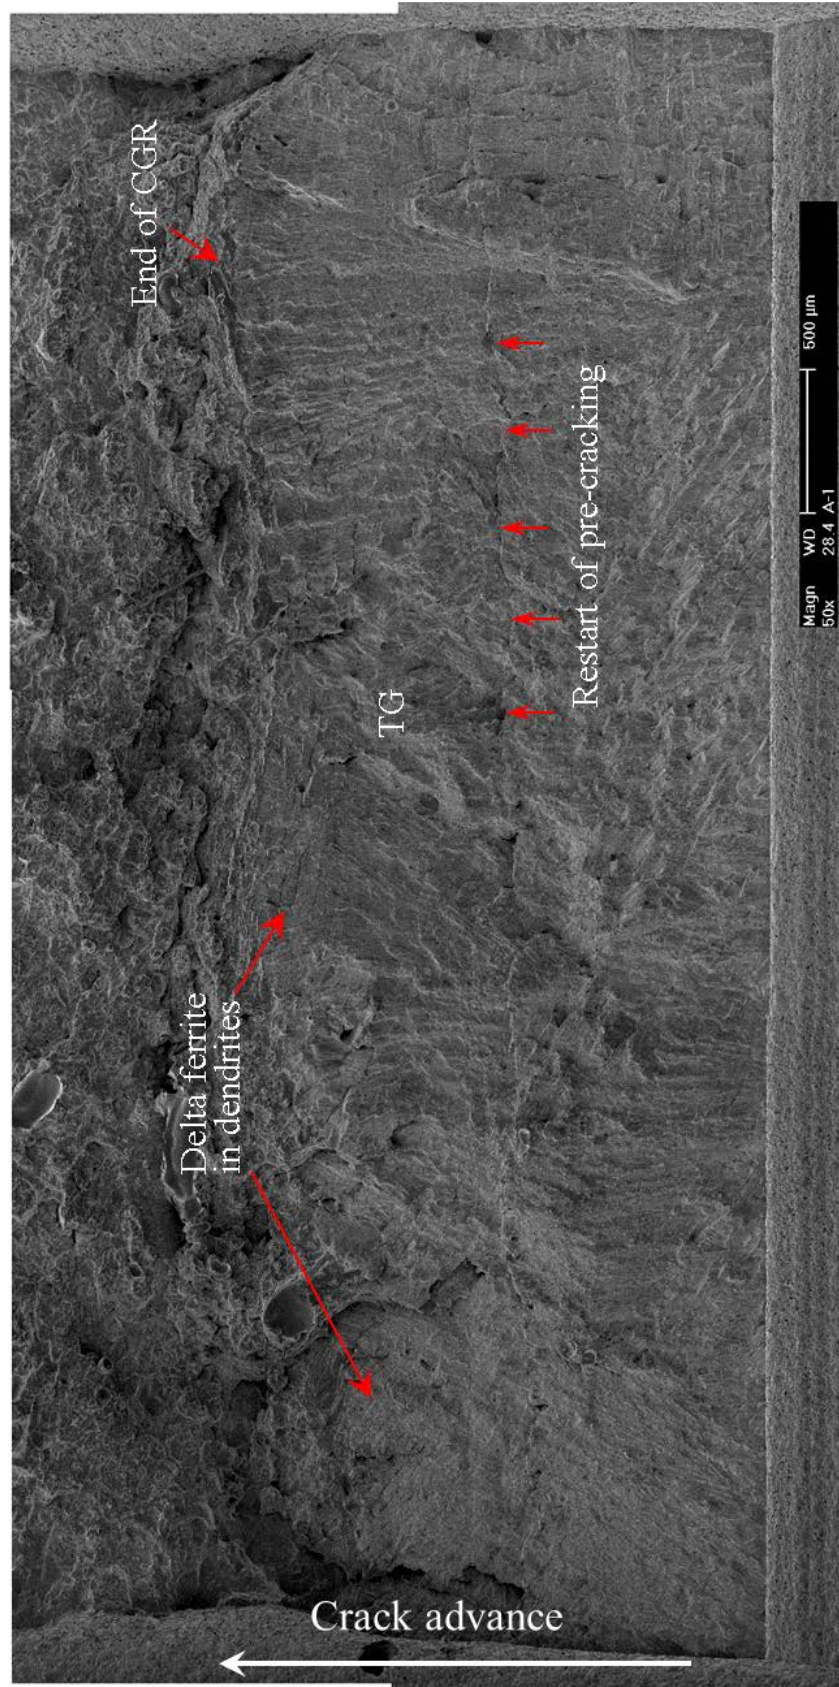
Fracture surface of specimen A-1 tested in PWR water.
